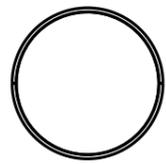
Body Plan—Section at aka.1.0 (Y=2269mm)
